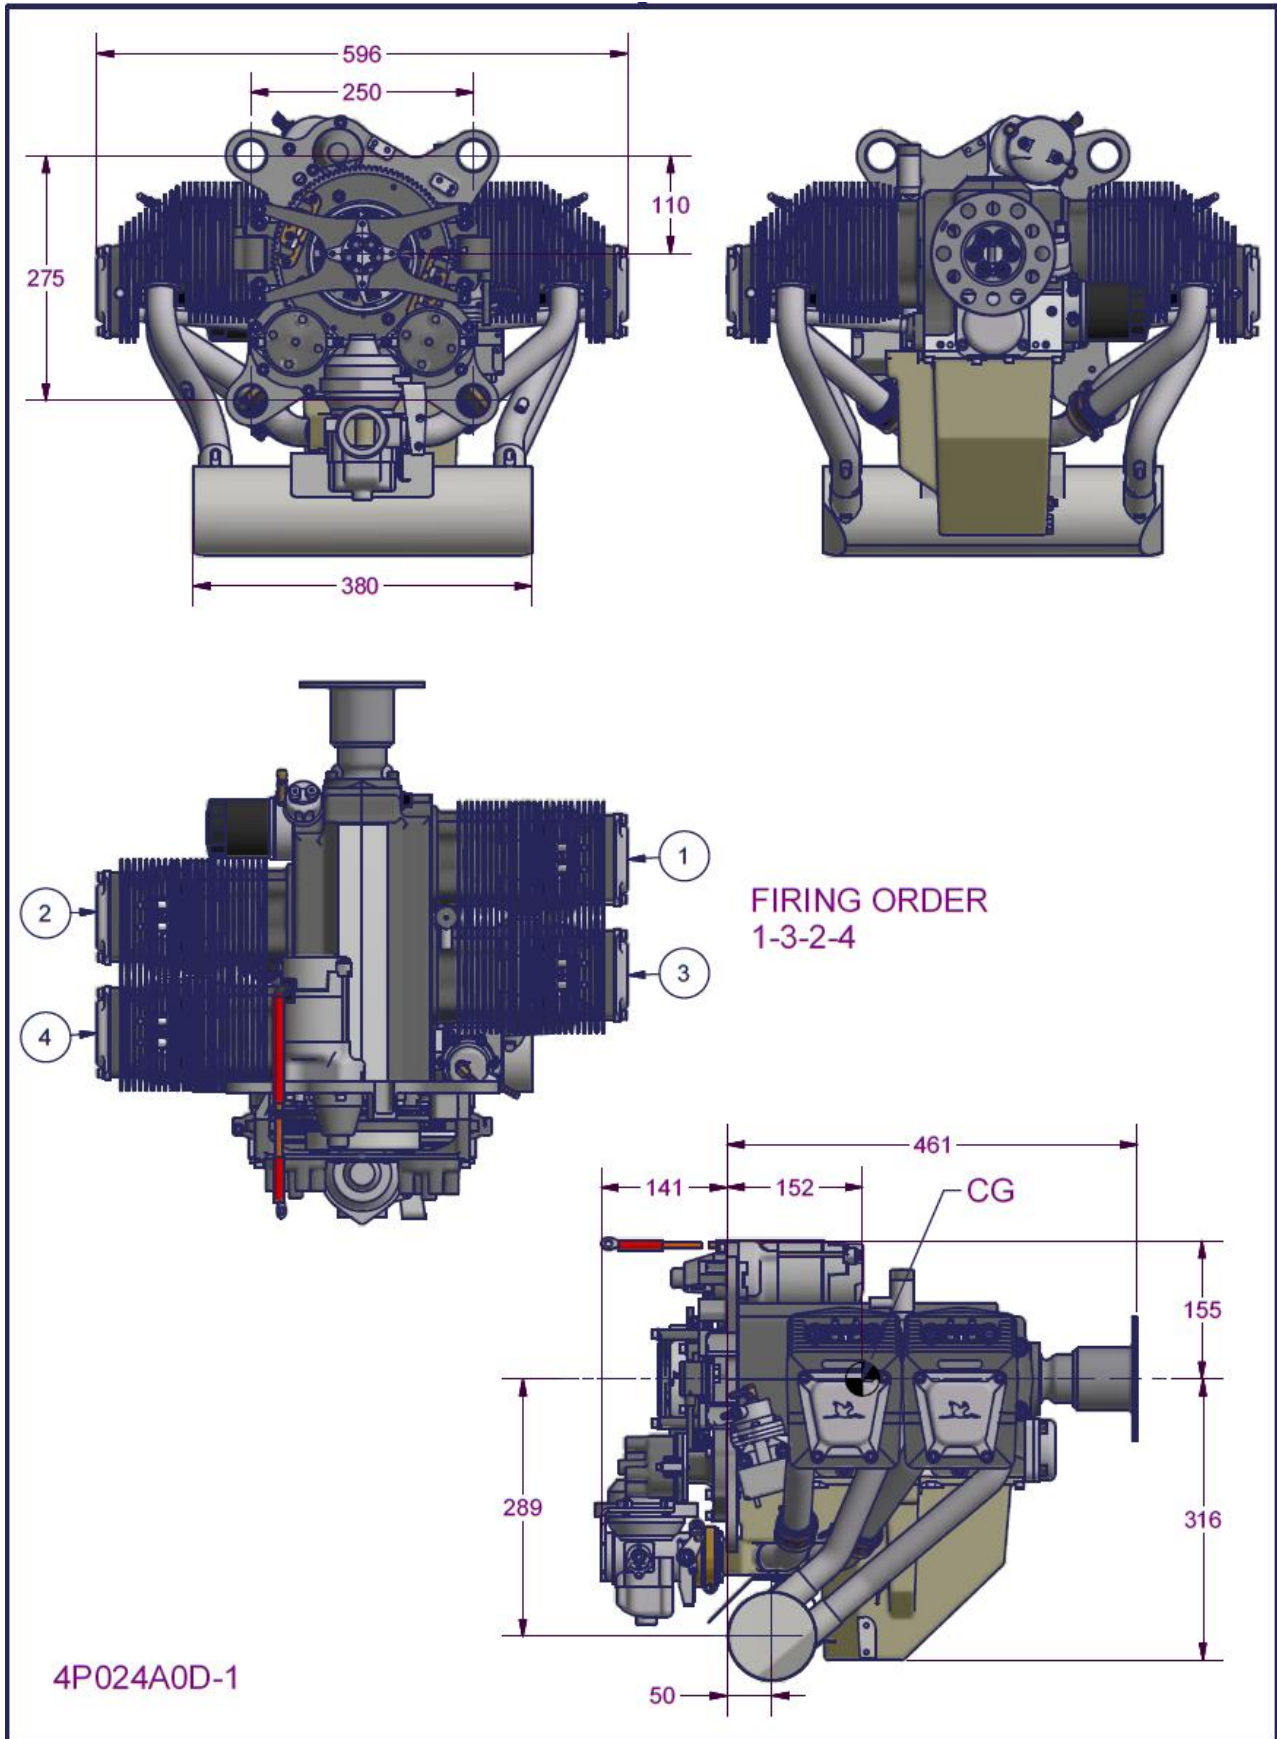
2200 Gen 4 Engine dimensions and layout
